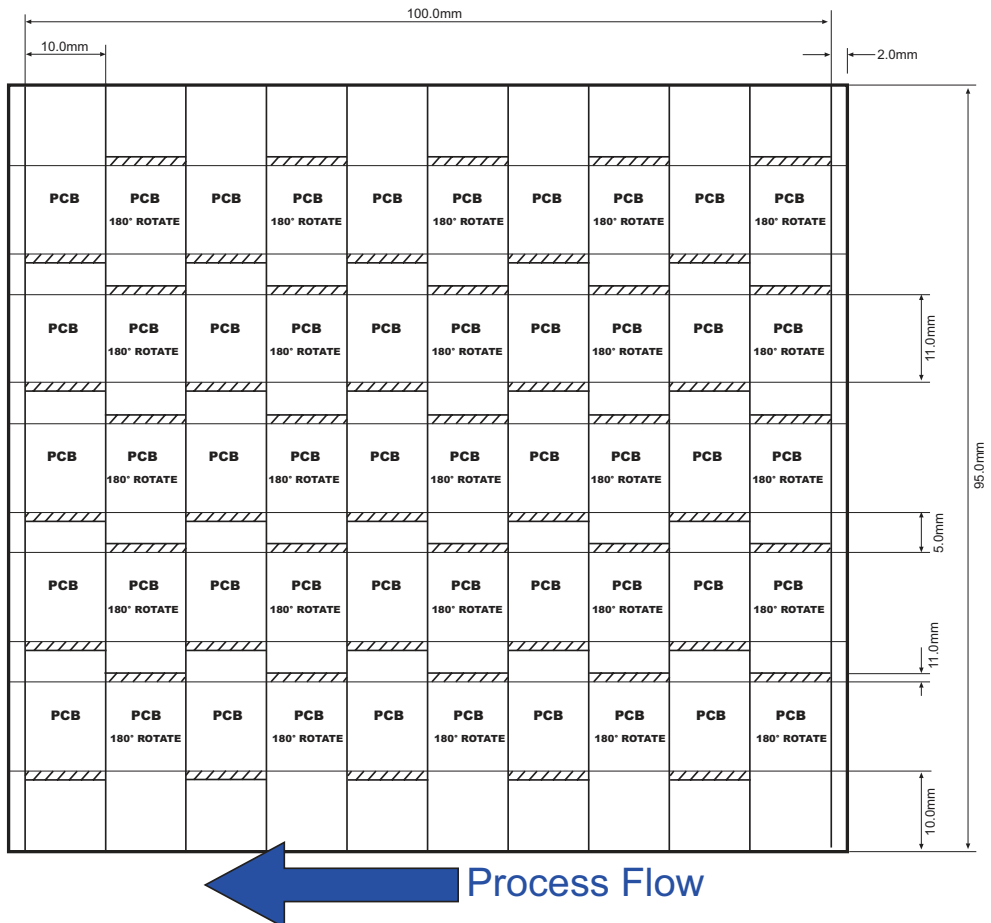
Original PCBA layout with unacceptable Failure Rate
